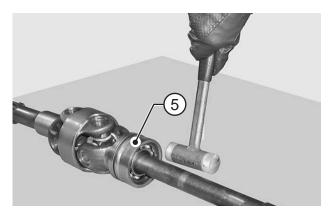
Install the complete bushing (5) onto the twin u-joint and set bushing into position with a plastic hammer.
